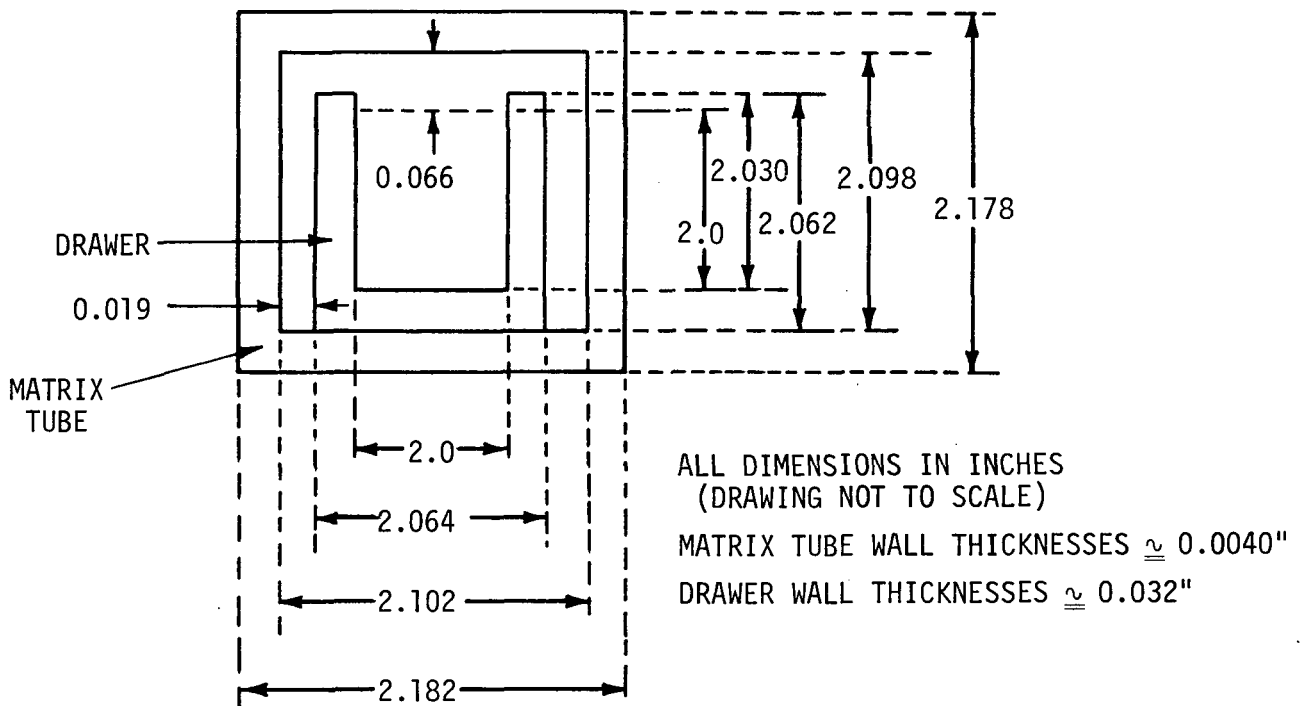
ZPR III Matrix Tube and Drawer Dimensions
